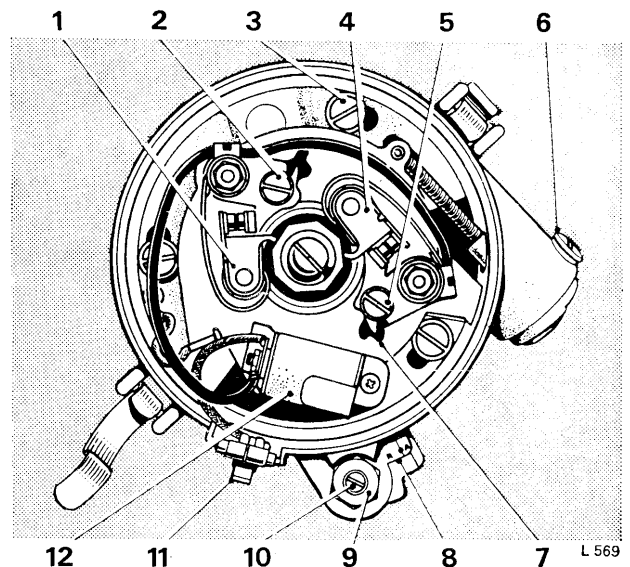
INTERNAL VIEW OF DISTRIBUTOR
